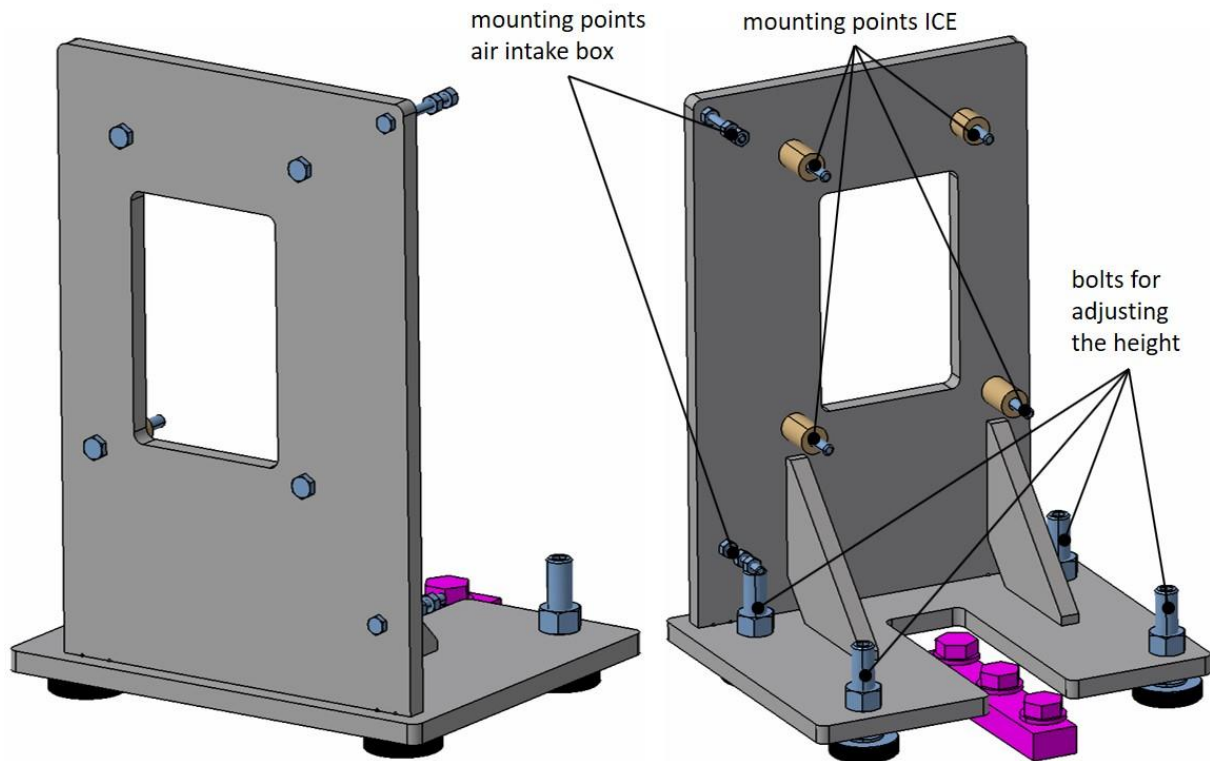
Assembly for mounting the ICE (incl. bolts)
